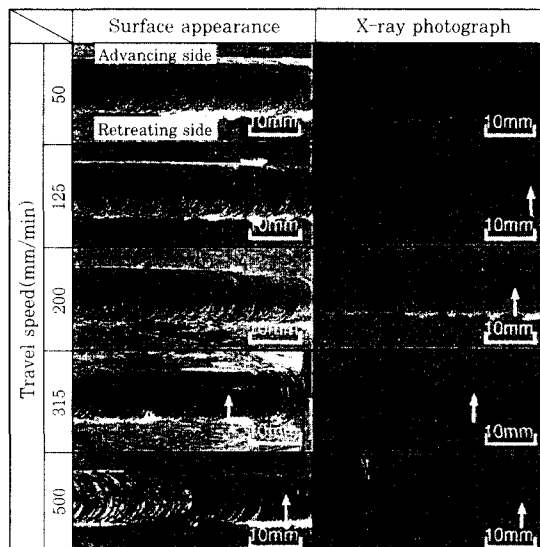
General appearances and X-ray photographs of AZ91D FS Welds at constant tool rotating speed, 1240rpm
